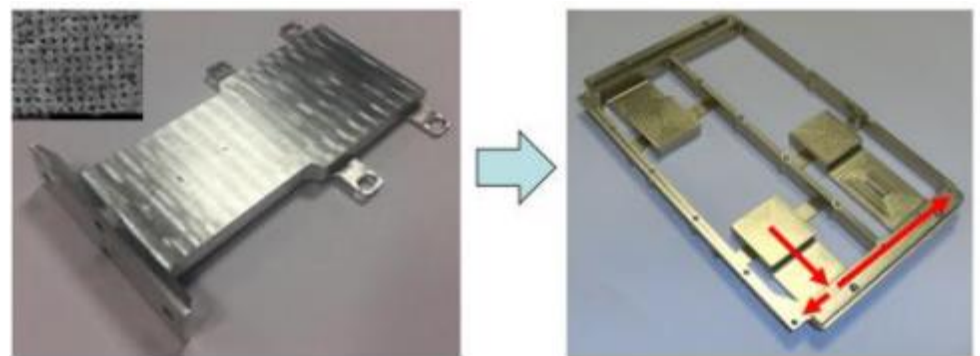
Integration of Additive Manufactured Vapor Chamber Heat Pipe Technology into Aerospace Electronics Chassis Example
